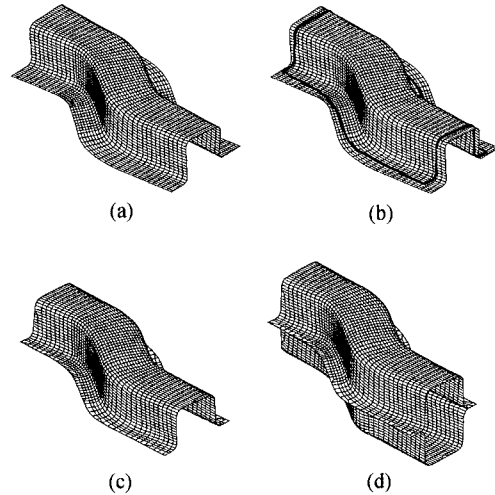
Forming process of the S-rail: (a) after punch forming; (b) trimming line; (c) after trimming and springback; (d) final assembled structure
